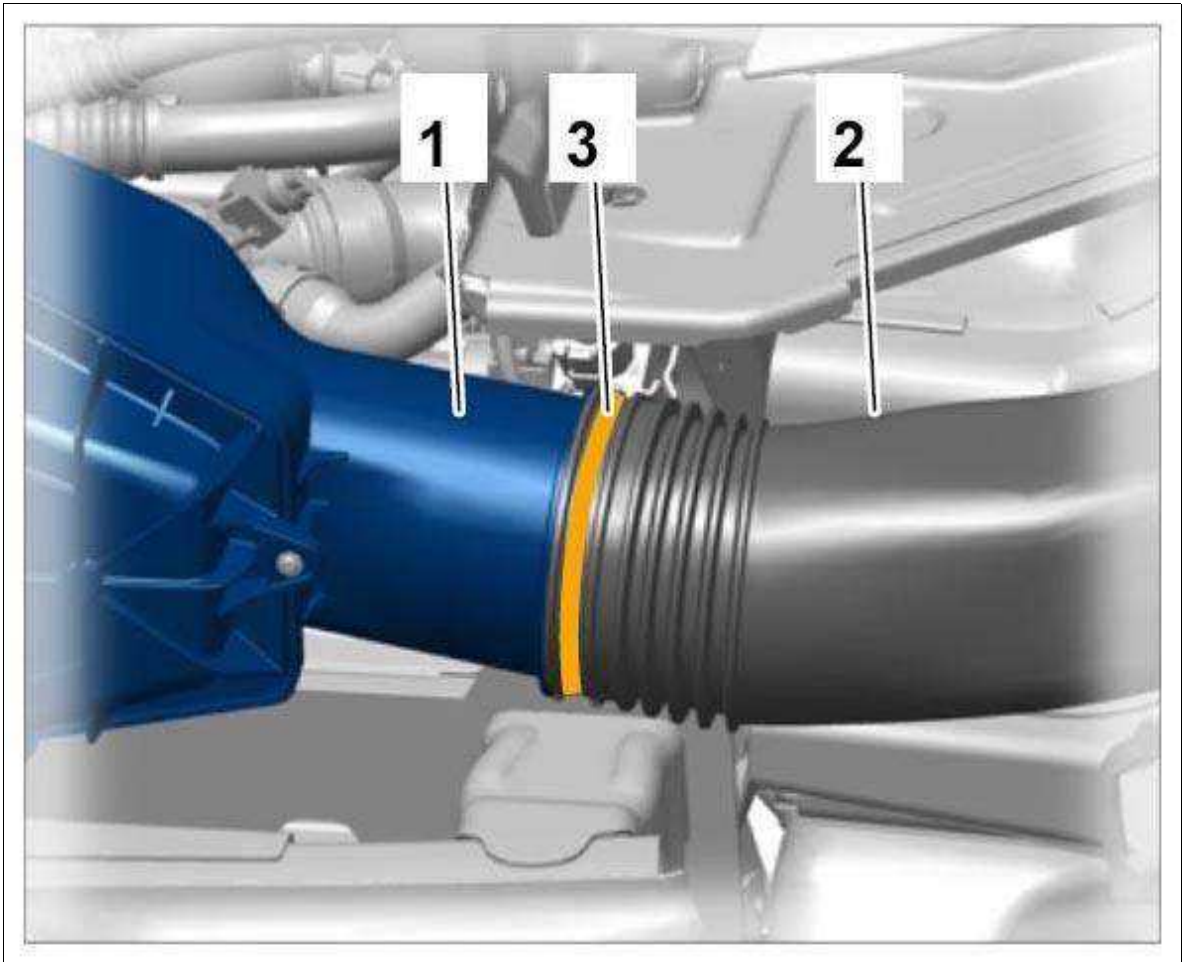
Identifying Rubber Shroud On Air Cleaner Housing
